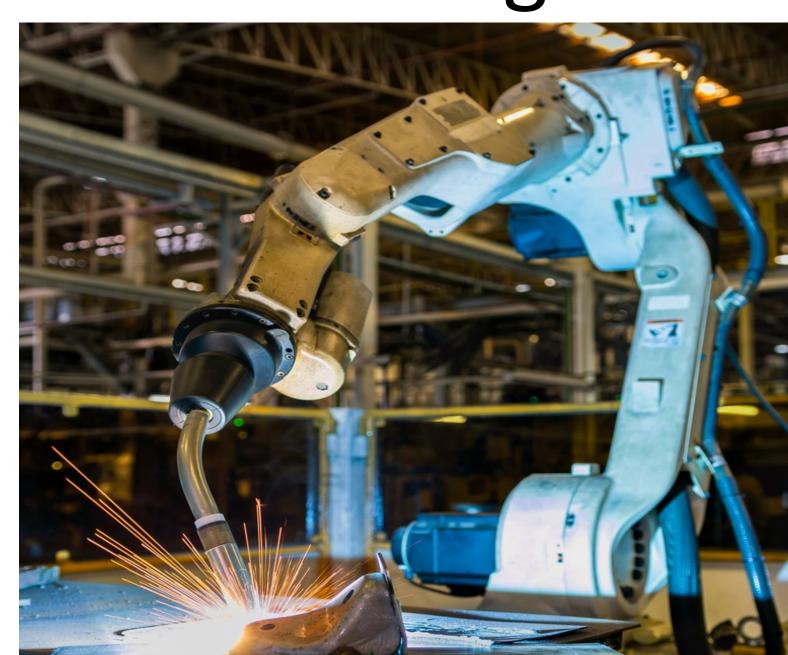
Welding robot. Reprinted from *Robotics Online Blog*, by Robots Online Marketing Team, 2017, Retrieved from <a href="https://www.robotics.org/blog-article.cfm/Robotic-Welding-Improving-the-Performance-of-Your-Automated-Welding-Processes/61">https://www.robotics.org/blog-article.cfm/Robotic-Welding-Improving-the-Performance-of-Your-Automated-Welding-Processes/61</a>.
